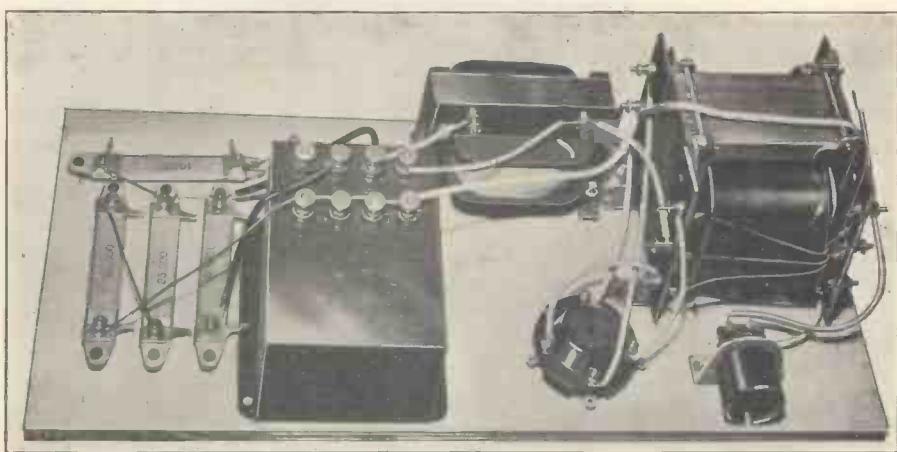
The "Super V.3" Power Unit completely assembled and wired.
